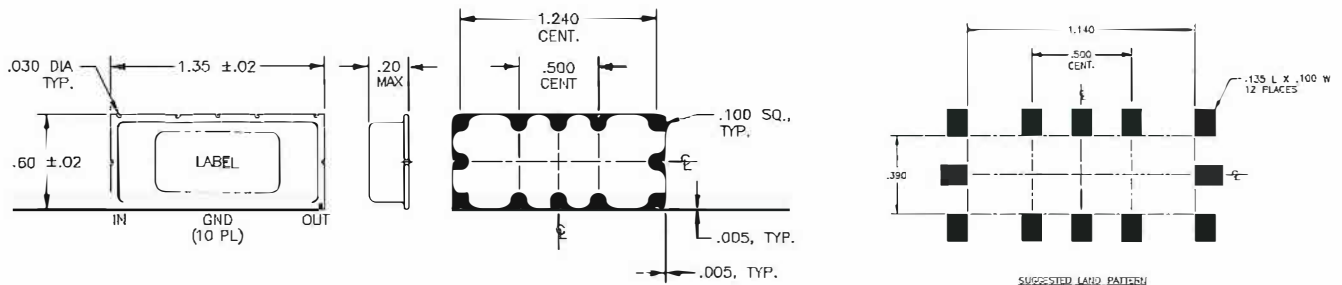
Suggested Filter Package Outline & Recommended PAD Drawings
